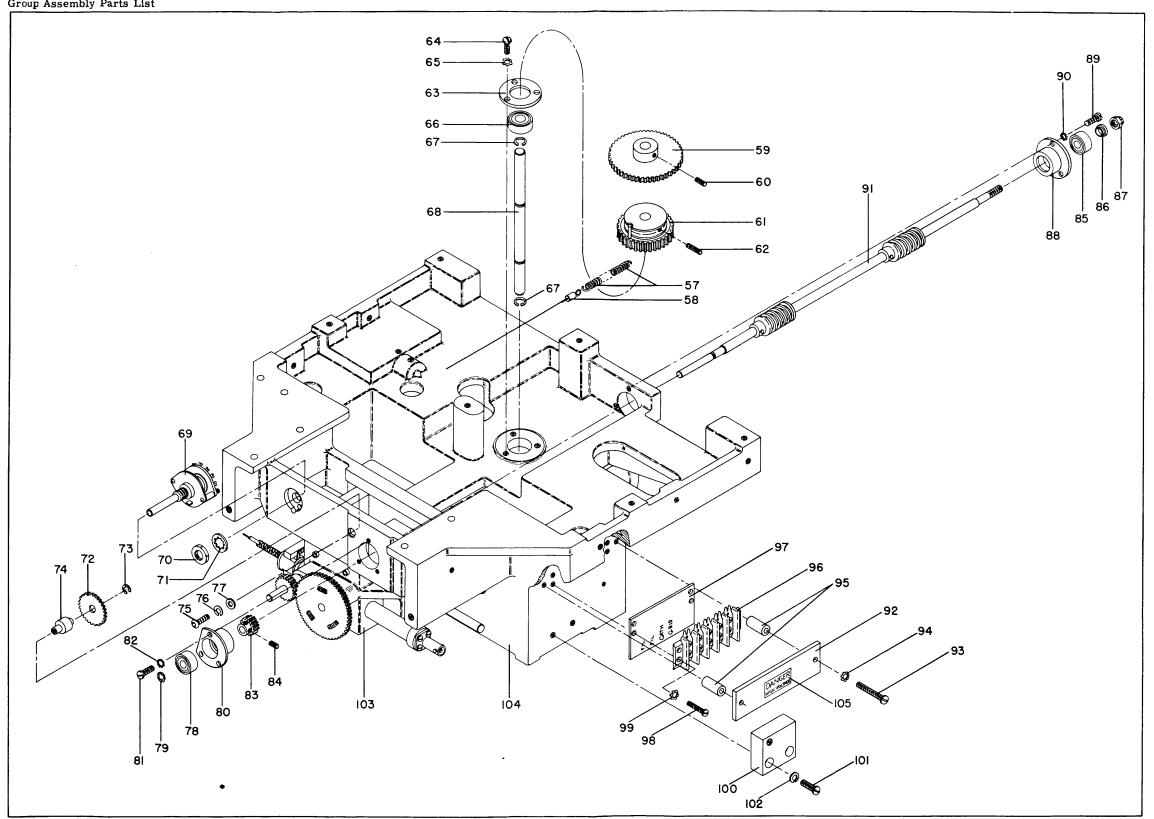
Oscillator Drive Assembly, Top Exploded View (Sheet 2 of 2 Sheets), Index Nos. 57 through 105
